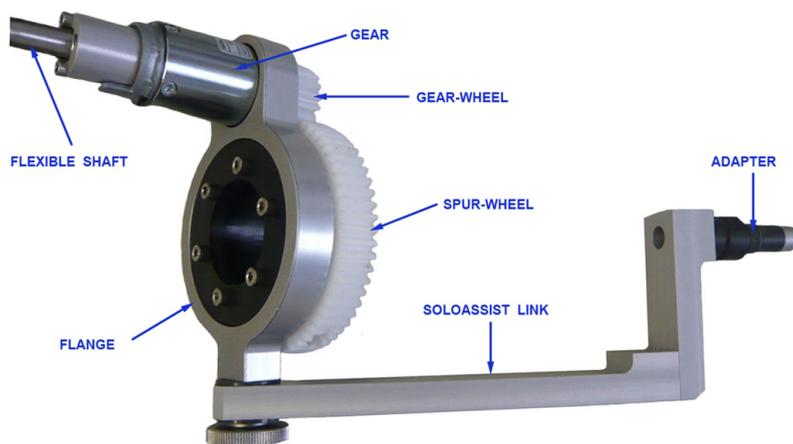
Rotary drive unit of the single-port platform attached to the SoloAssist link.
